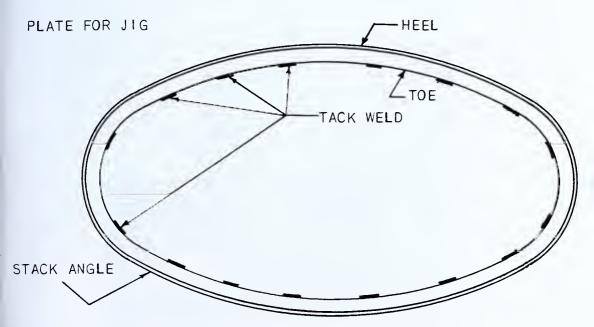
Toe of Angle Tack Welded to Plate
